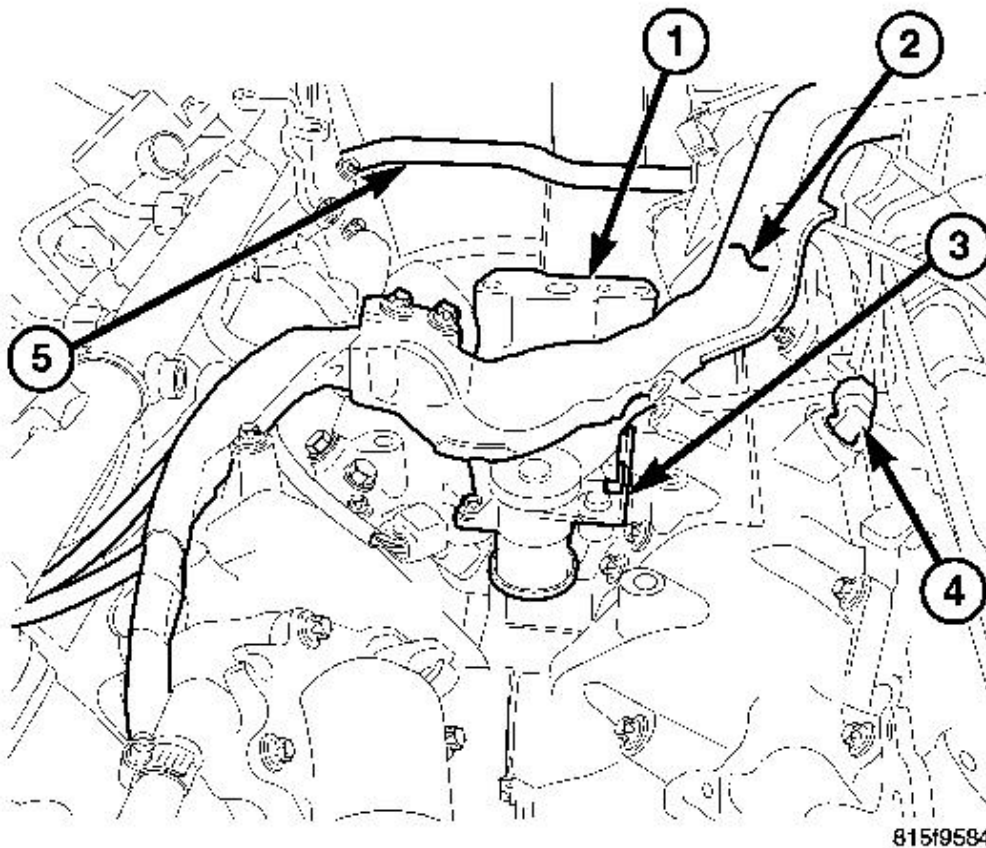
Turbocharger Oil Housing Adapter, Main Engine Wiring Harness, Swirl Valve Actuator & Coolant Temperature Sensor
